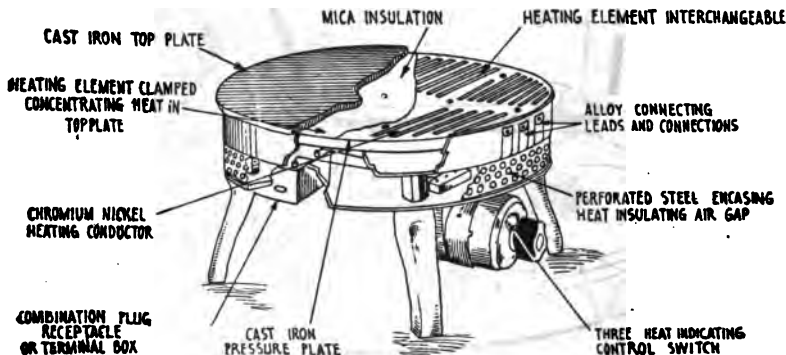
,581.—American electric disc stove. Adapted to laboratory and other industrial purposes. The maximum surface temperature is 750° Fahr.
